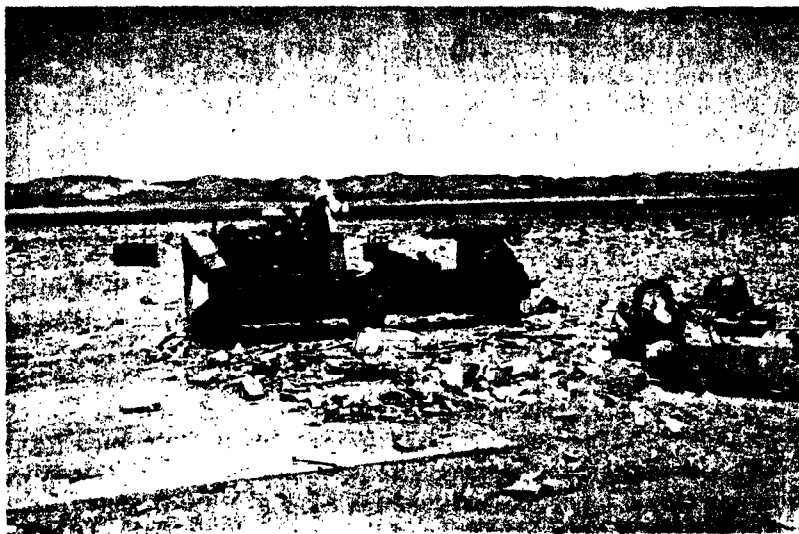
Machine tools after the nuclear explosion (10 psi overpressure).
